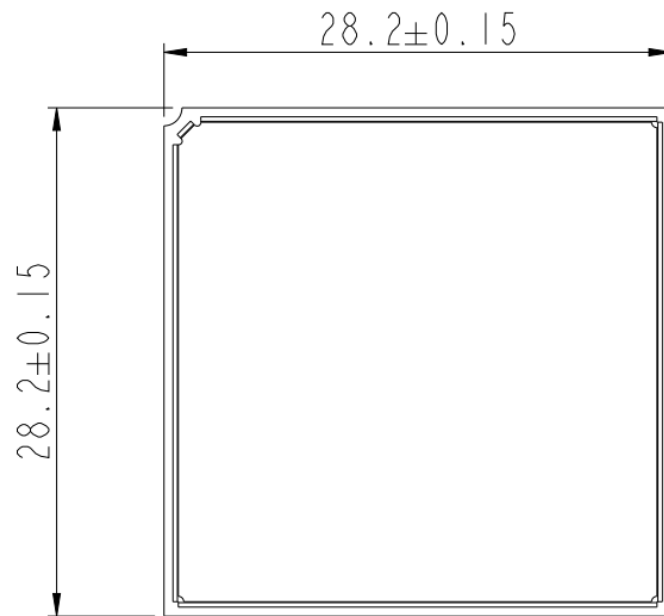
LE910R1 Mechanical Dimensions (Top view)
